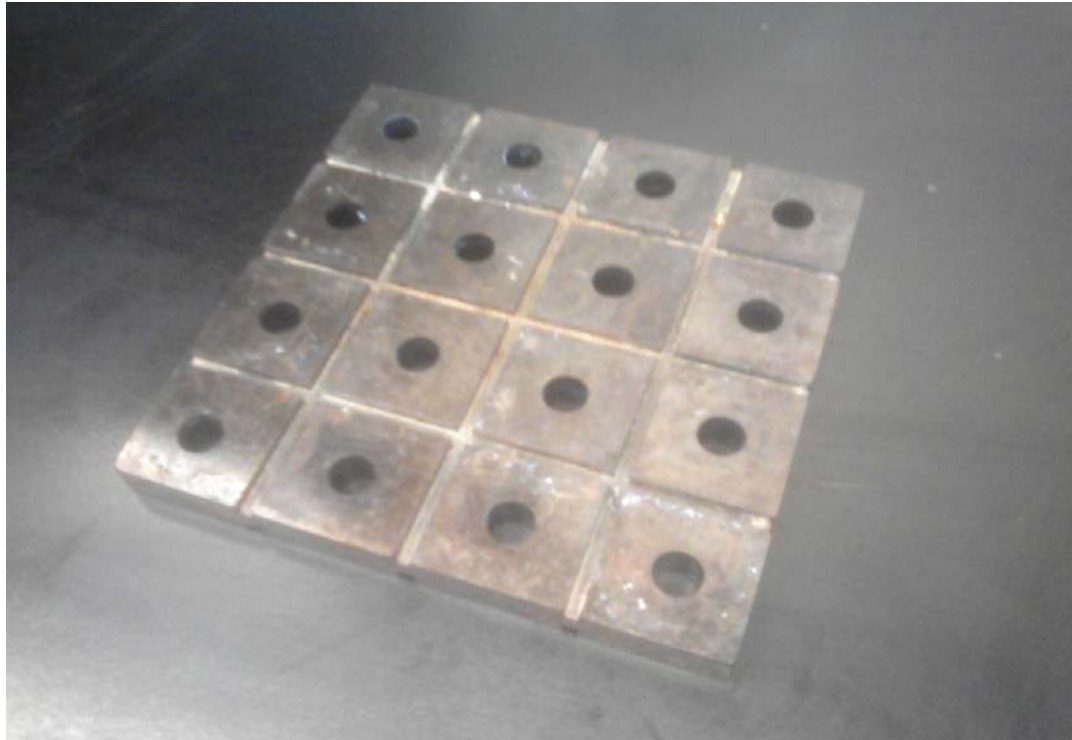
Photograph of 16-well cuvette mold each with a 9-mm diameter used in the fabrication of aerogels via RSCE. External dimensions are 125 x 125 x 12 mm.
